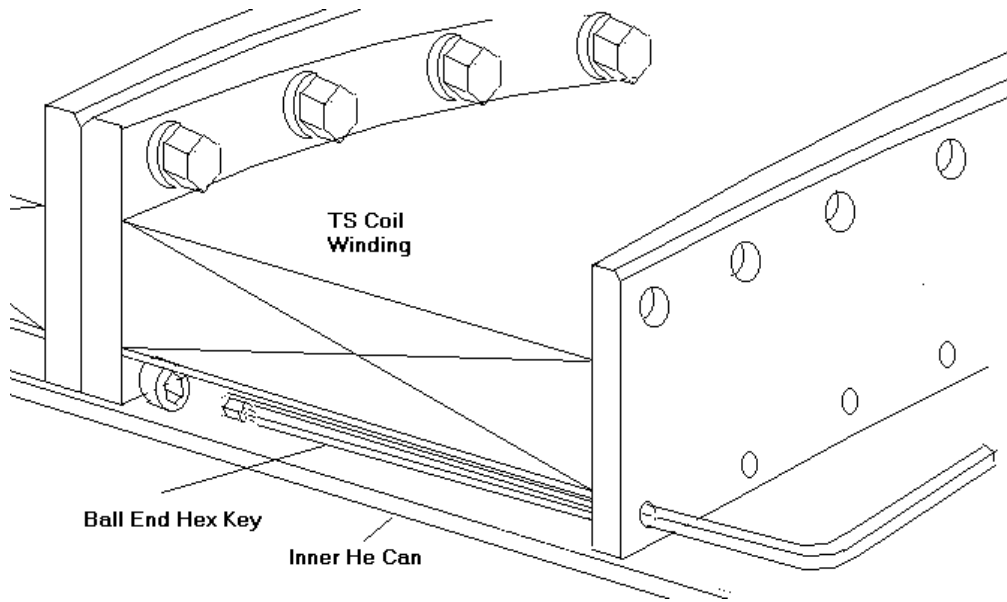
A sequential bolted assembly scheme was required for a pool-cooled design. Access with a hex key through the neighboring flange was necessary. The present conduction-cooled design eliminates the tight fitting He can and allows for a much simpler assembly with full access to the bolting in the bore.
